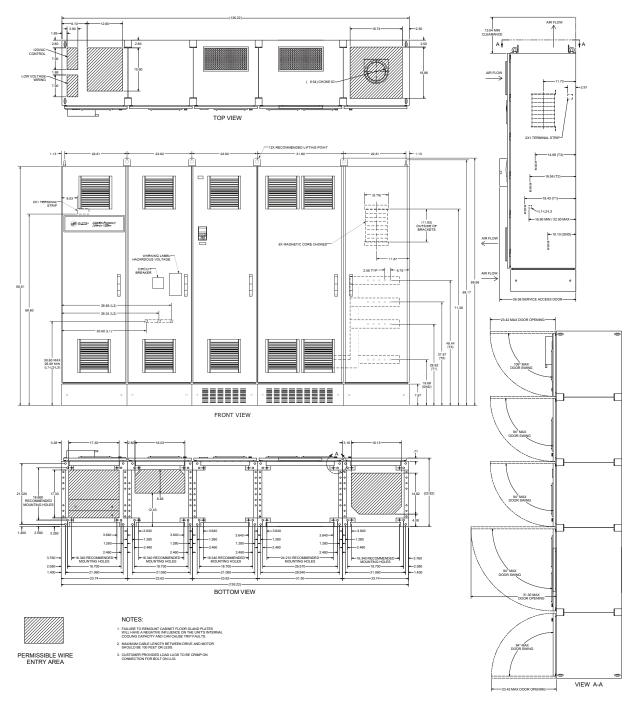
AFDL (remote-mounted) cabinet dimensions: Frame D4 and E2, in.
